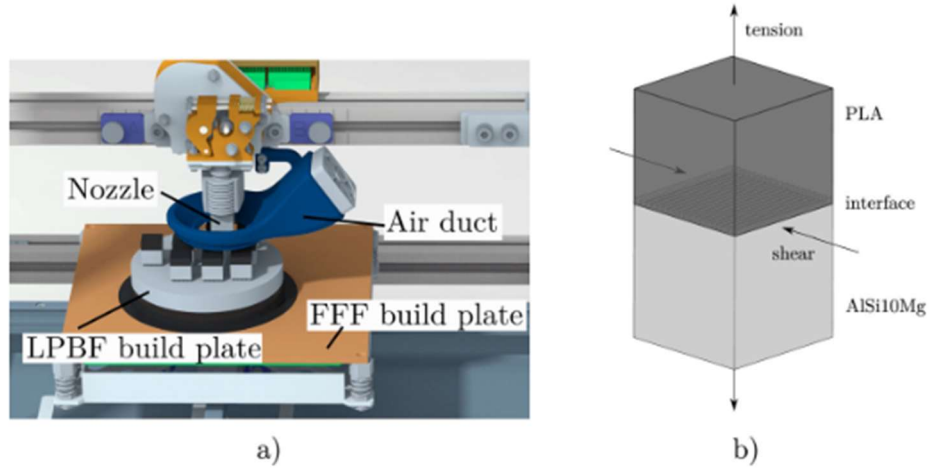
(a) LPBF-FDM manufacturing setup; (b) CAD model of finished specimens (Englert et al., 2022).
